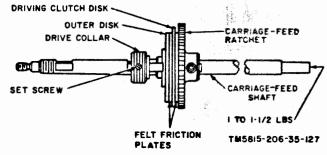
Carriage-feed-shaft drive-valar adjustment (TT-4B/TG).
